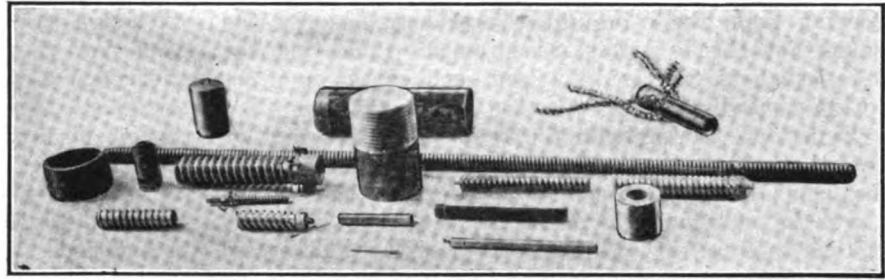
EXAMPLES OF THREADS AND MATERIALS
